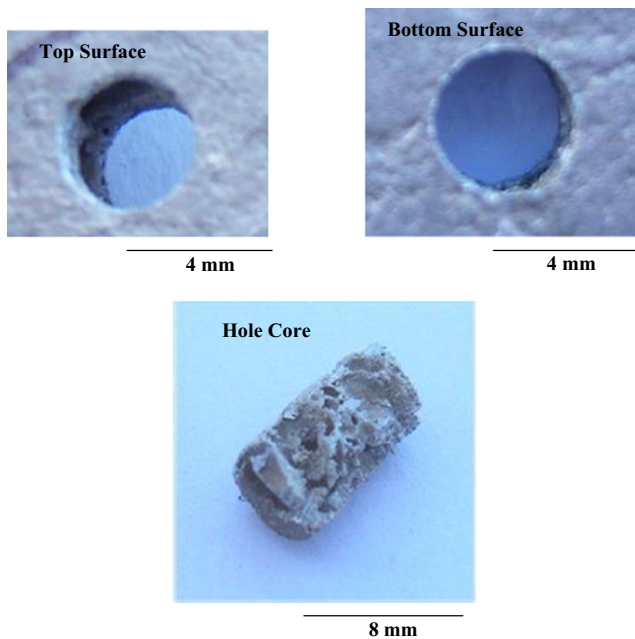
Photograph of top and bottom surfaces of hole and hole core
